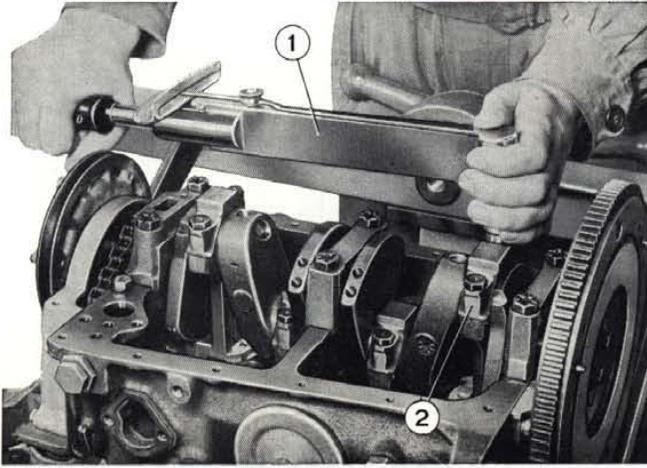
Installing connecting rod-piston assembly. 1. Tool A. 60273. - 2. Piston complete with pin and rings.
